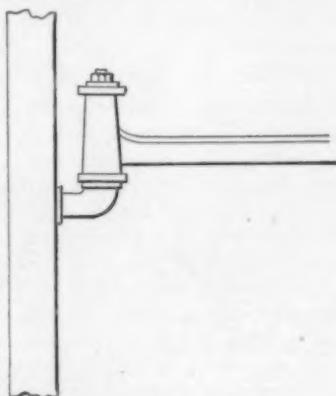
AND 5.—AMERICAN AND FRENCH SINGLE AND DOUBLE BEARING KNUCKLES.
